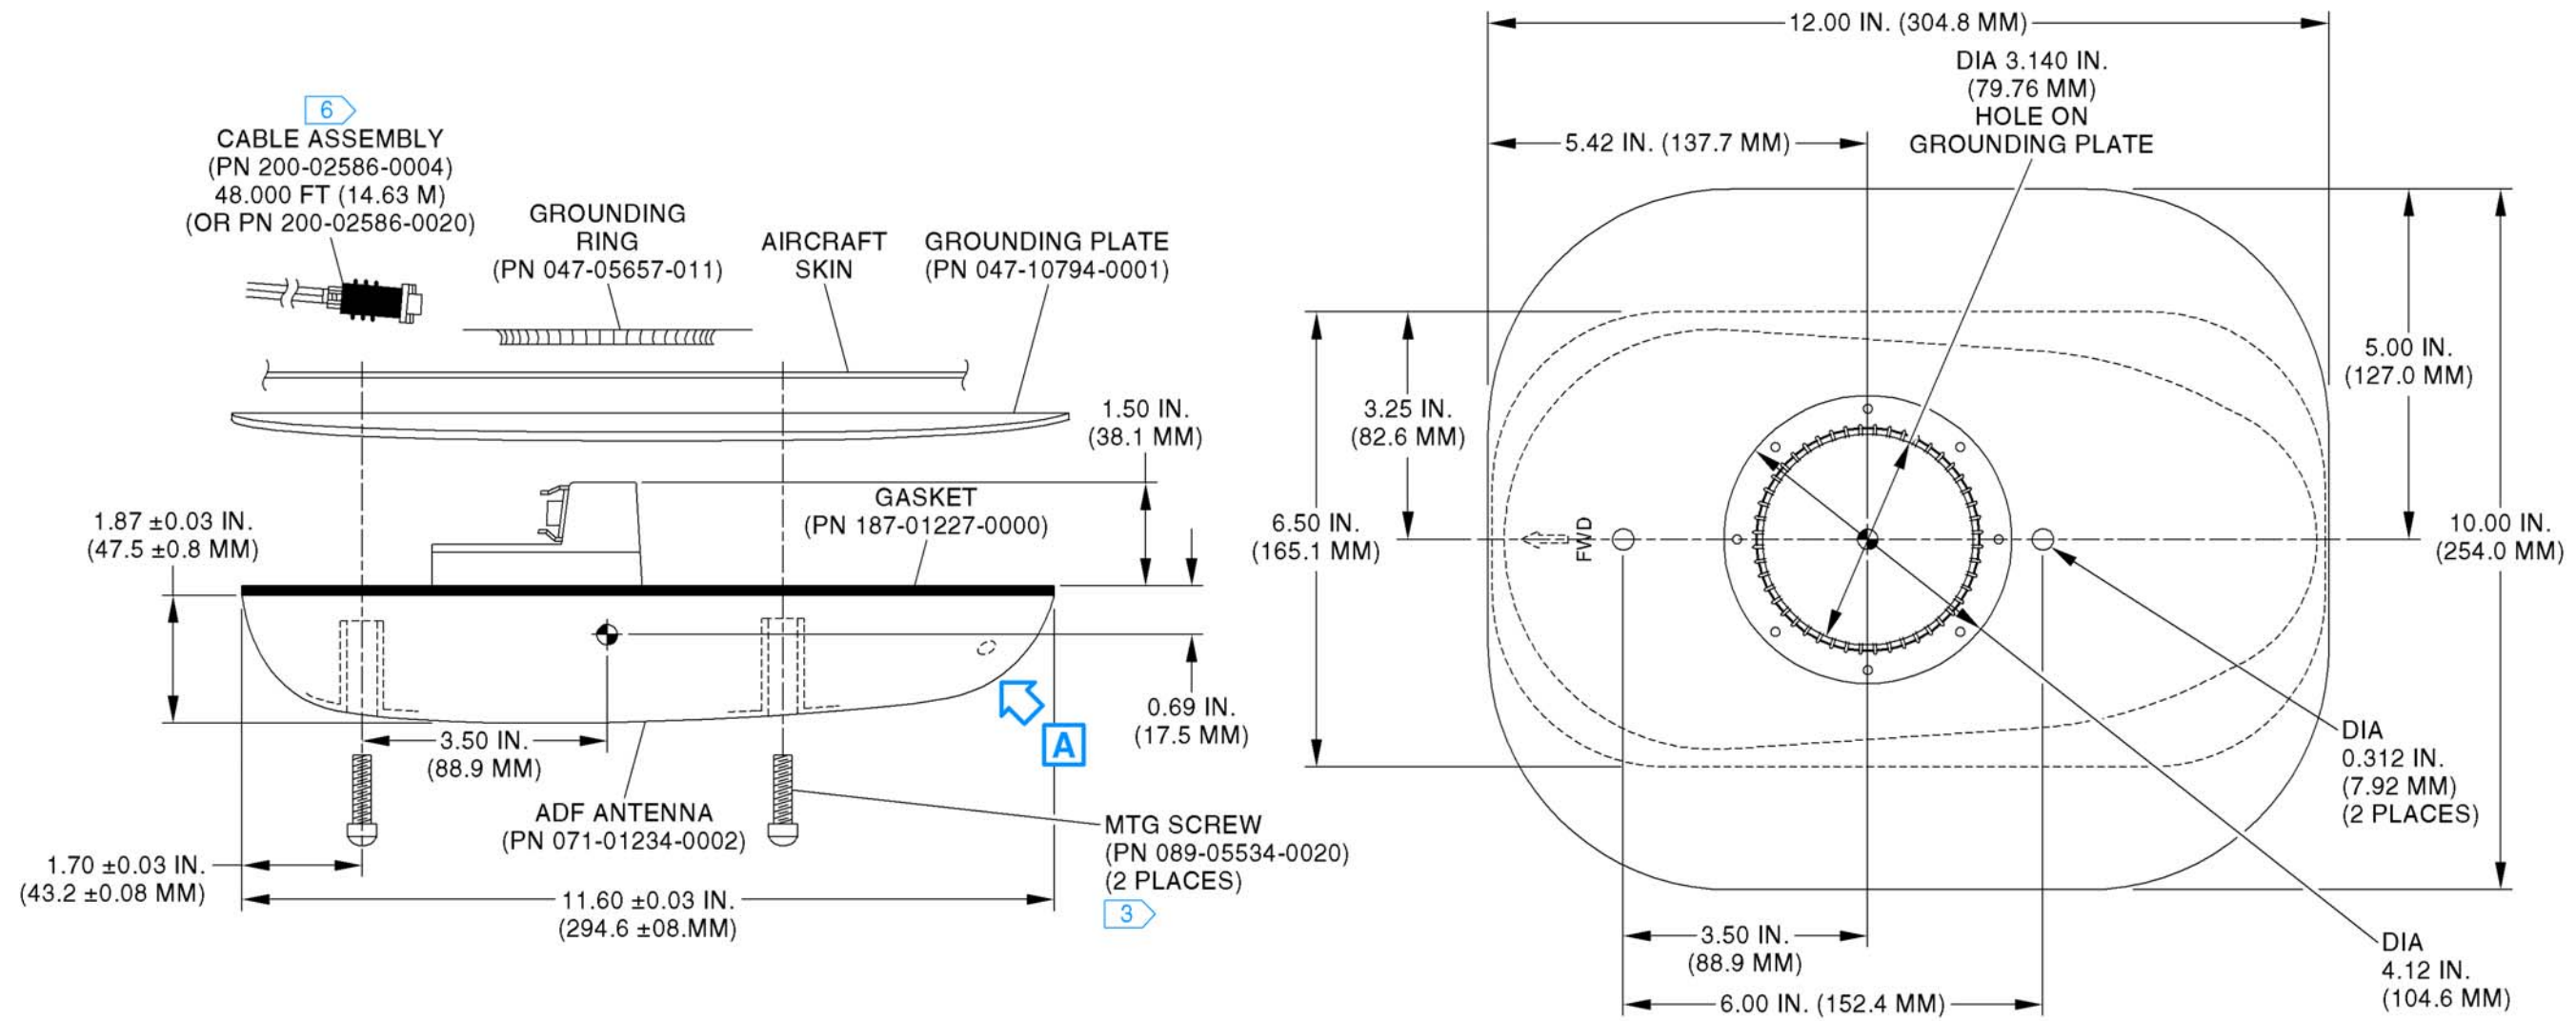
(Sheet 1 of 1) KA 44B Outline and Mounting Drawing
